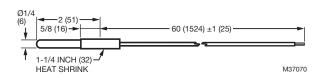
Approximate dimensions of SP3000-WR Encapsulated Temperature Sensor in in. (mm).
